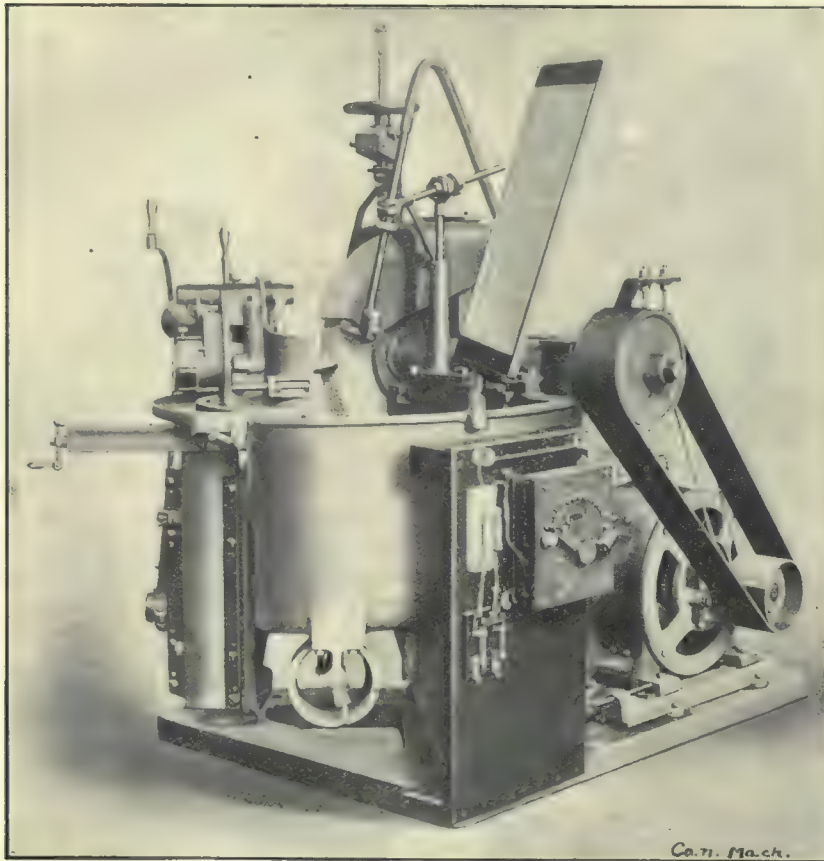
A Tool Grinding Machine. With Operations so Tabulated That an Unskilled Man Can Grind Tools For the Shop Accurately.
